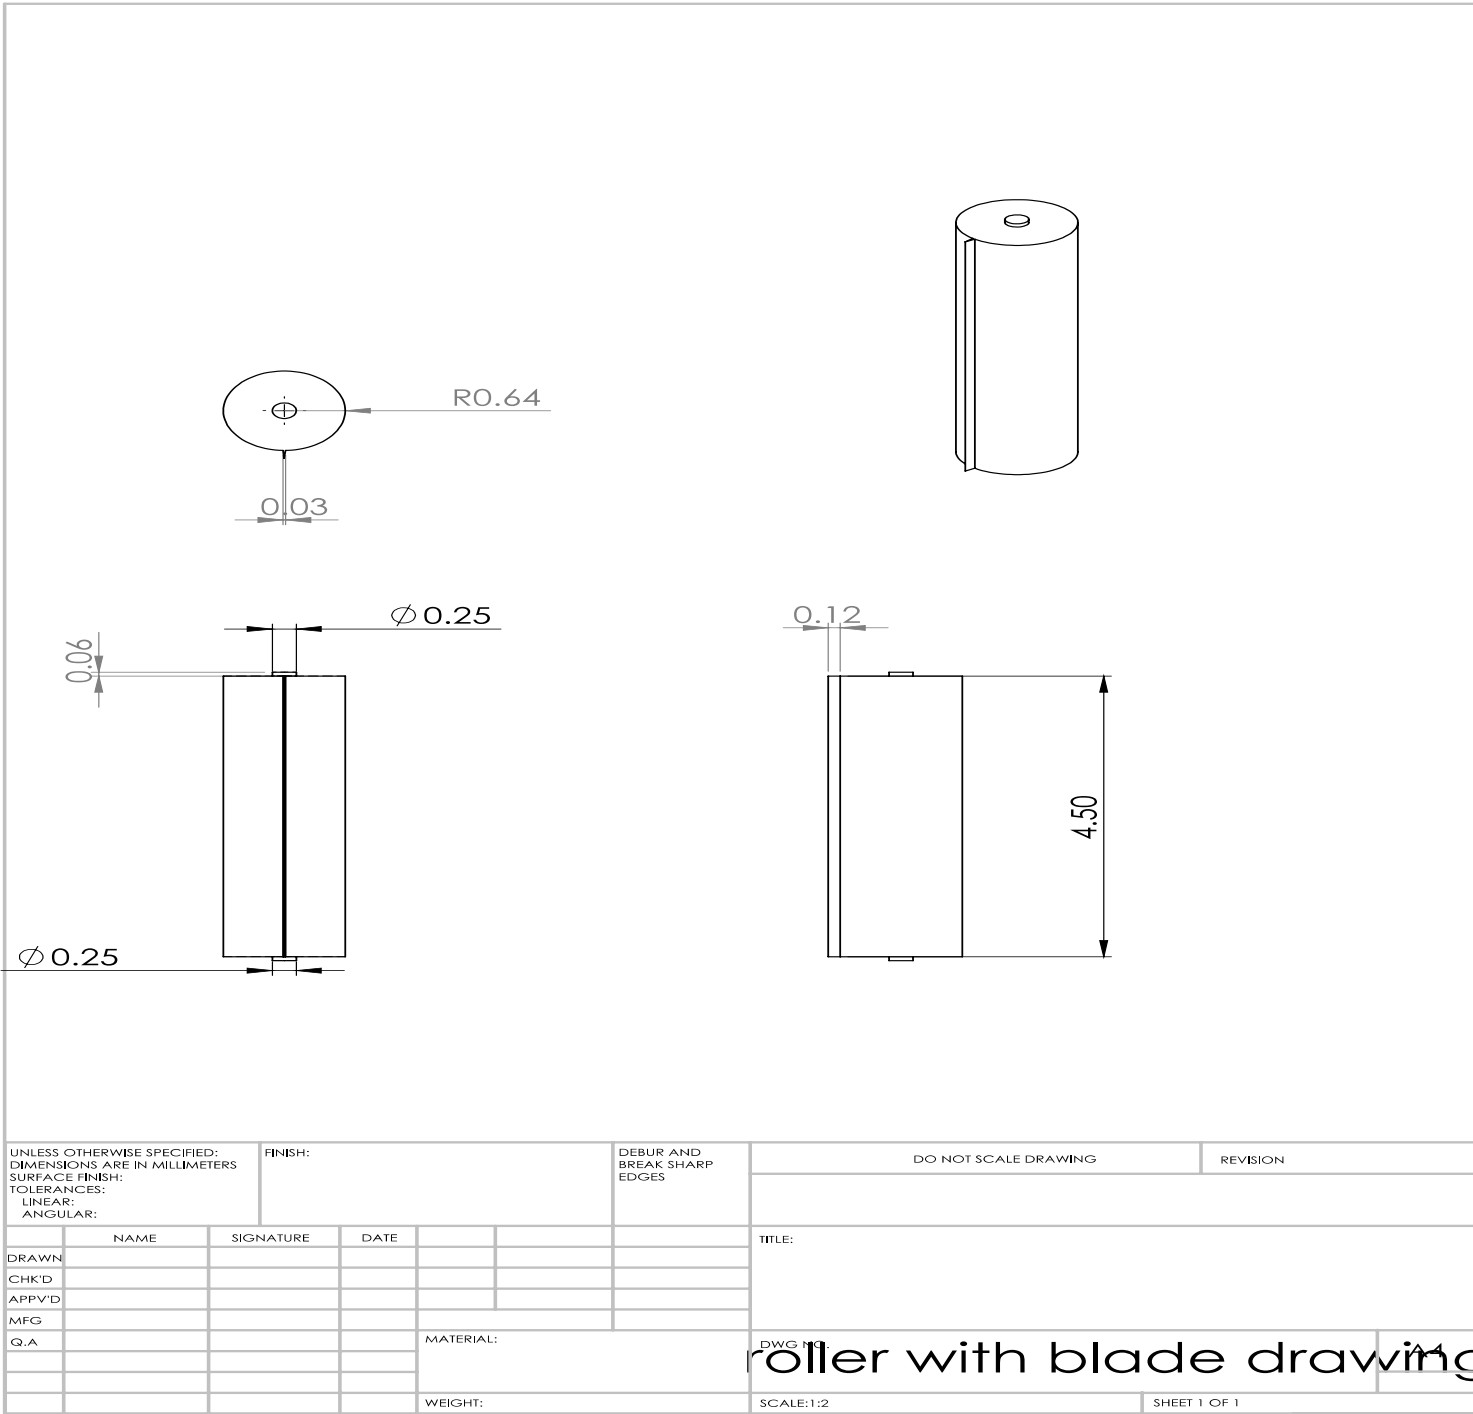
Blade Roller Multi-view Drawing with Isometric
